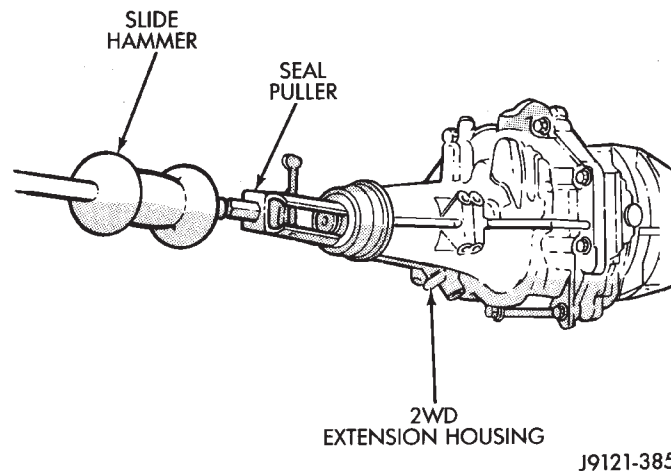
Removing 2-Wheel Drive Extension Housing Seal
